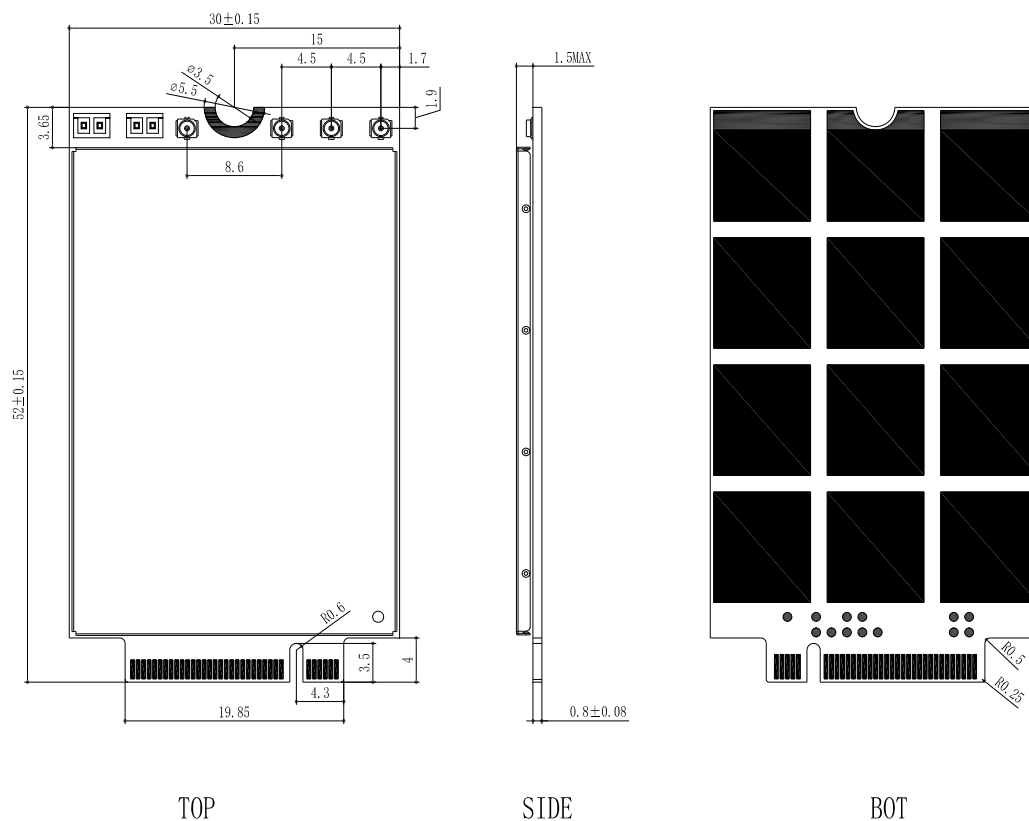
Mechanical Dimensions of the Module (Unit: mm)
